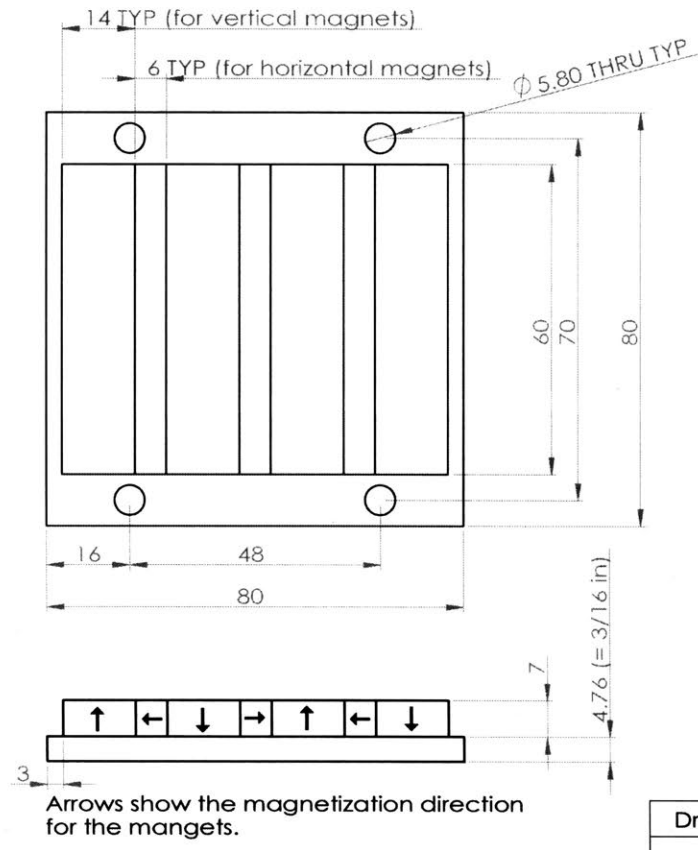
Drawing of the mounting plate for our new fine-tooth motor, also serving as the dynamometer upper plate. Page 4 of 4.
